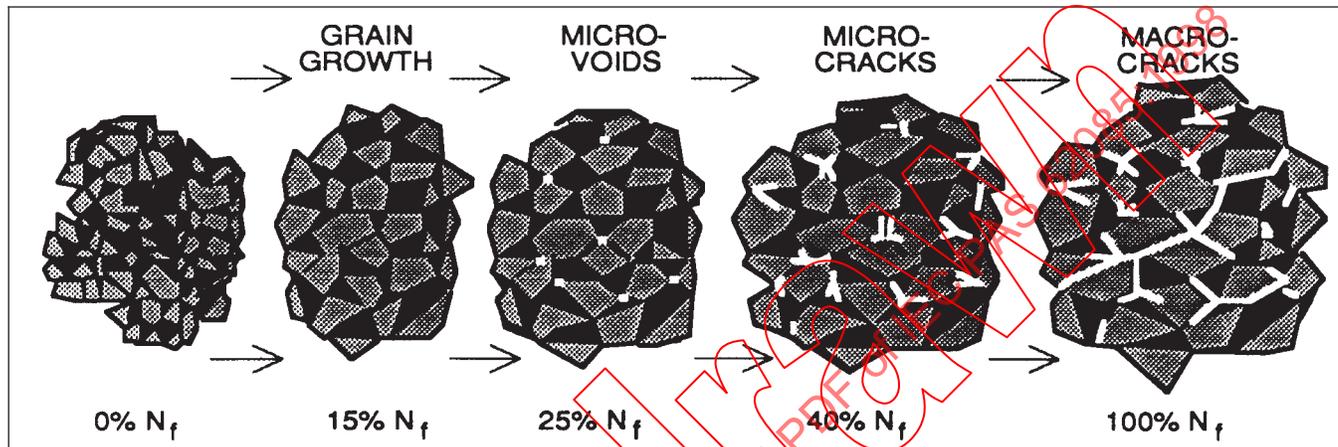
Description of the Effects of the Accumulating Fatigue Damage in Solder Joint Structure [Ref. A-2: 1].
